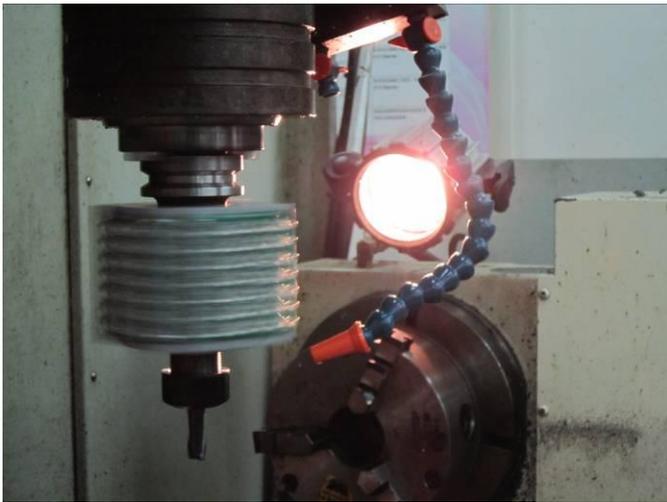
The proposed sensing devices setup performed on an end-milling machine tool.
